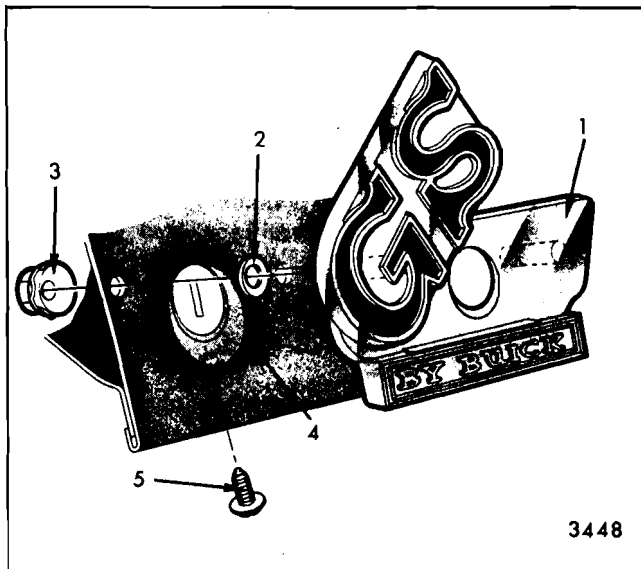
Lock Cylinder Emblem - Buick 43437, 44637 and 44667 Styles
